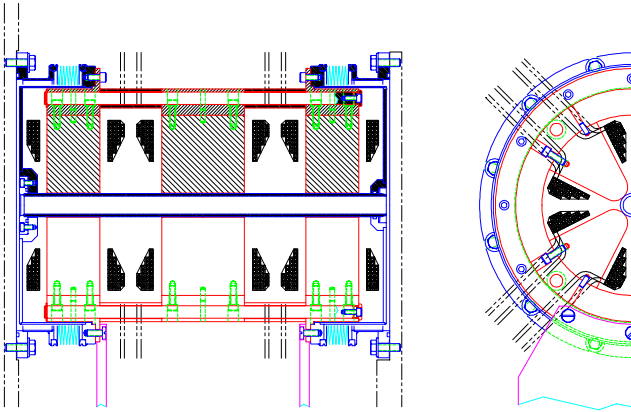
Assembly drawing of the ISAC-DTL quadrupole triplet.
